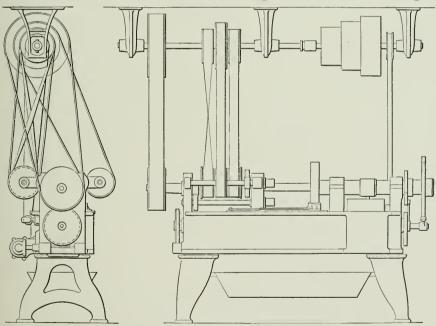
Countershaft and Drive for Prentice Automatic Turret Machine
